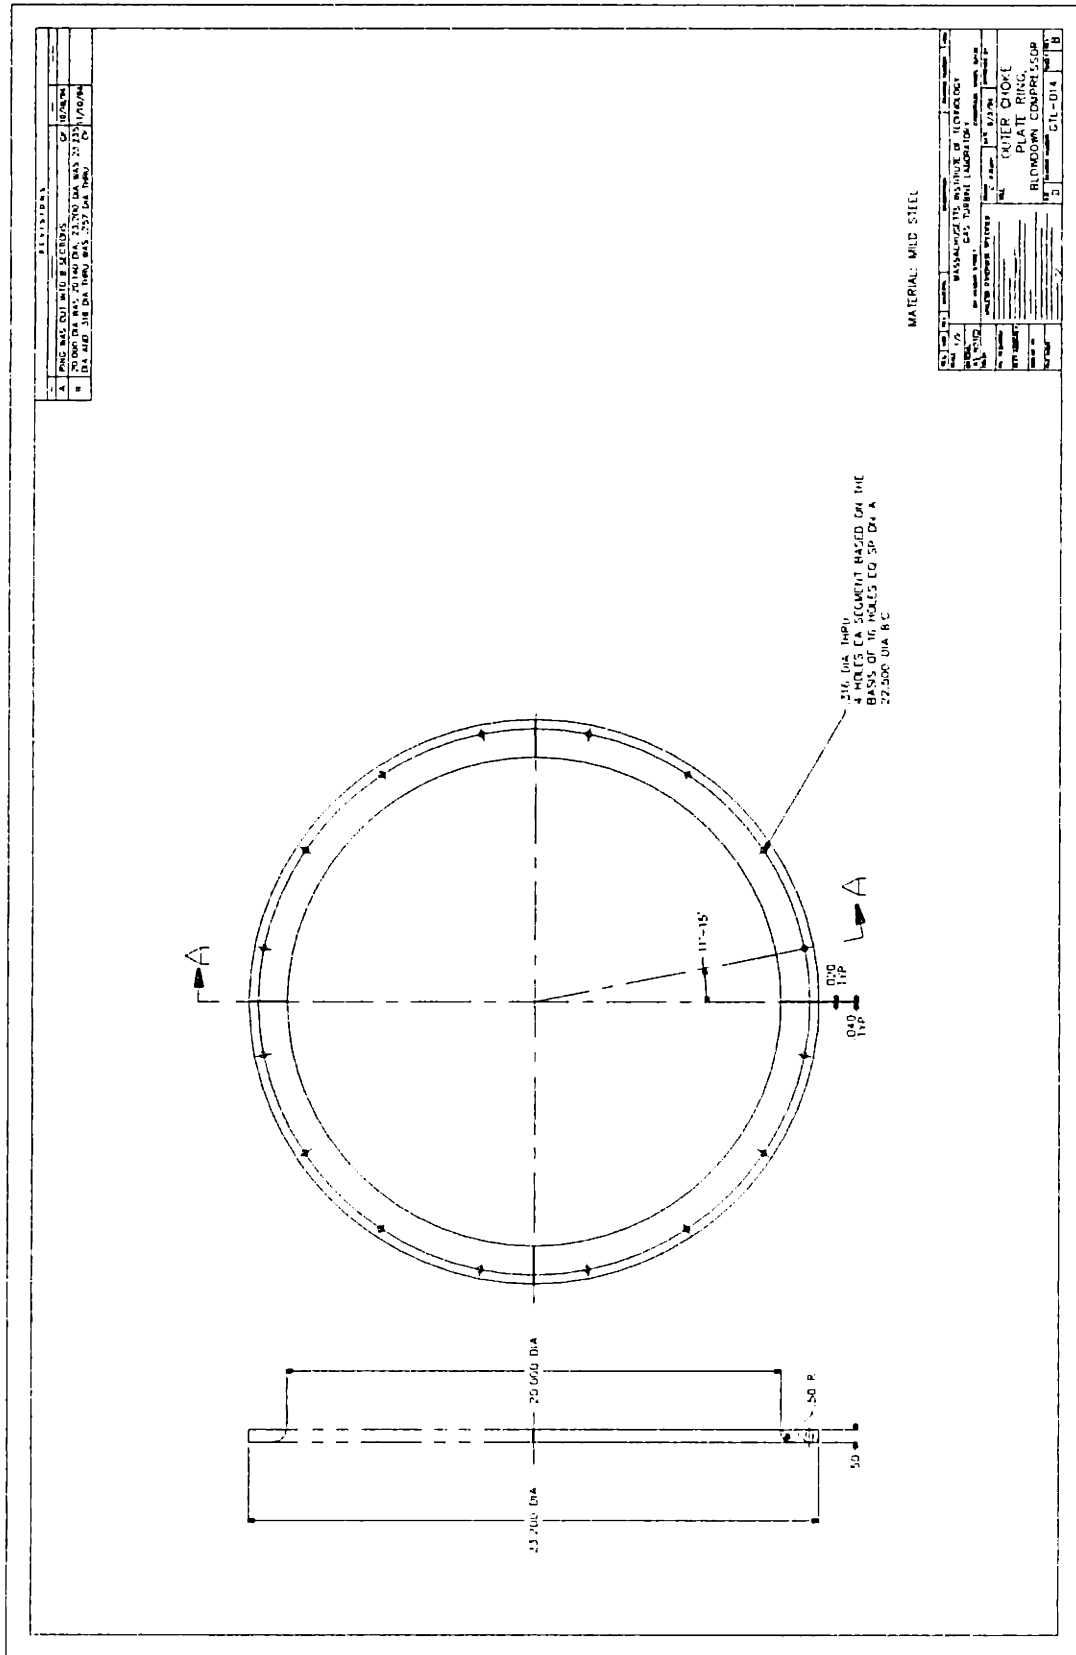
Fan stage drawing (GTL-014): choke plate (baseline)
